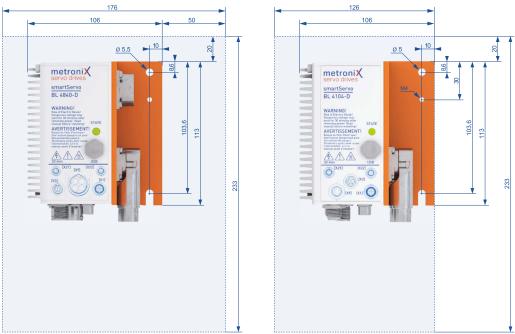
Dimensions and installation clearance for BL 4800-D (left) and BL 4100-D (right)
